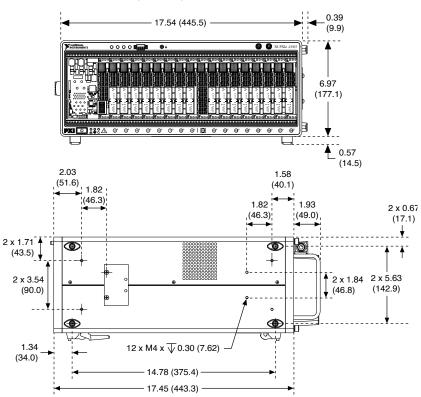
PXIe-1085 Chassis Dimensions (Bottom)
